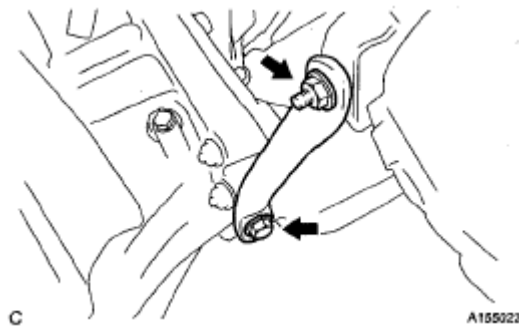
Removing Bolt, Nut, And Manifold Stay
